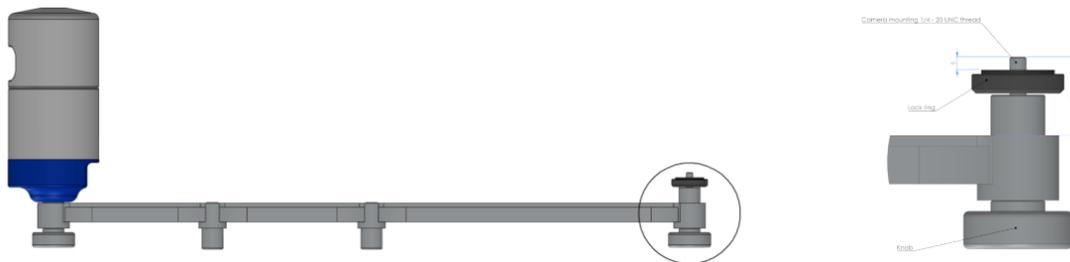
(left) Design of the mounting and (right) detail of the mounting screw for the secondary sensor.
